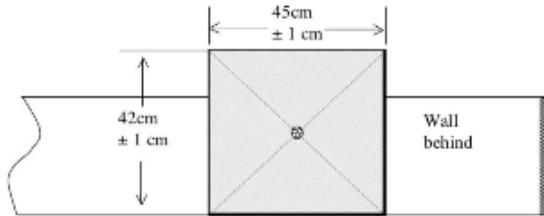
Refrigerator Door dimensions - Front View (DoorClosedFrontViewSm.jpg)
